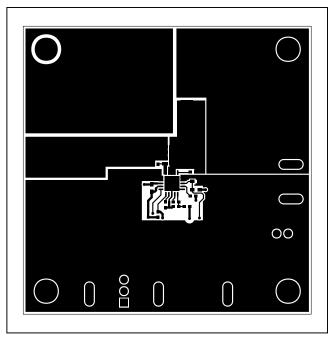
MAX17506 3.3V Output EV Kit PCB Layout—Component Side
